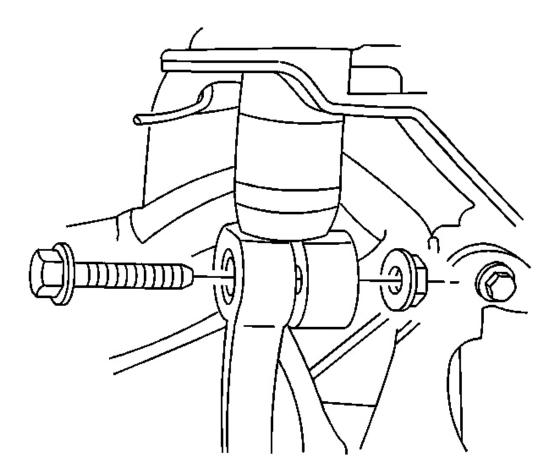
View Of Shock Module Yoke To Shock Absorber Pinch Bolt & Nut Courtesy of GENERAL MOTORS CORP.
